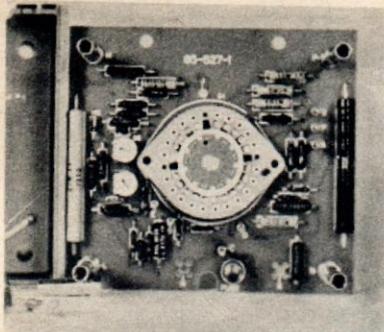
Function switch is soldered to both front and rear pc boards, then connected via shaft.
